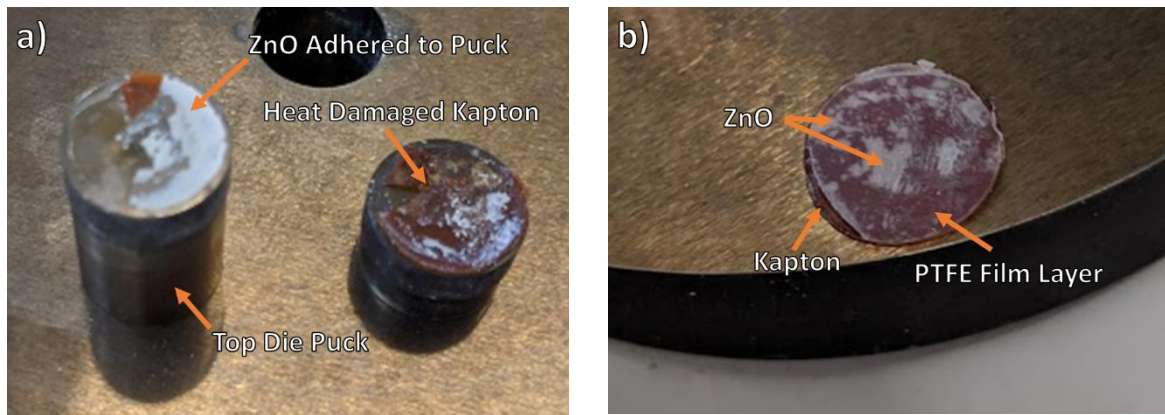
a) Image of a sample cold sintered at 200°C 250MPa after removal from the die without any barrier layer. Kapton® sheet has become heat damaged, with a layer of ZnO adhering to the die piece instead. b) Sample post sintering with a barrier layer. ZnO has sintered to the Kapton® but the PTFE has become stuck to it. Removal of the PTFE would remove the ZnO layer with it.
